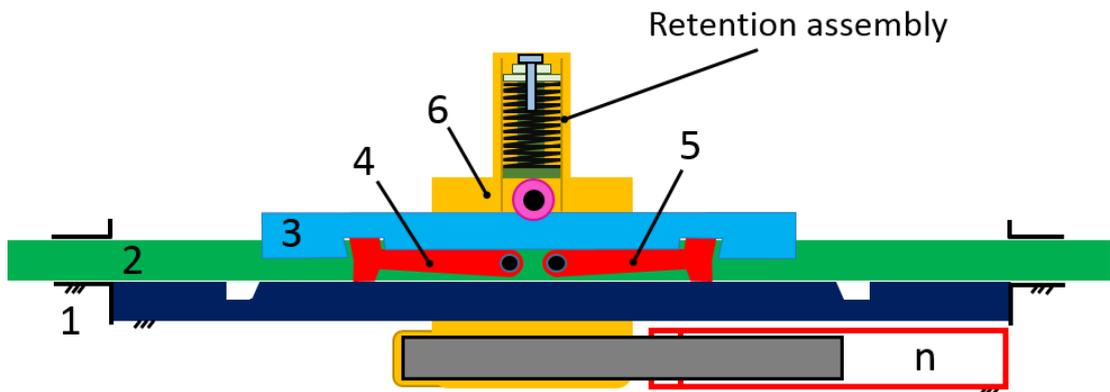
Schematic representation of driving rods' integration with the throwing block in front view
